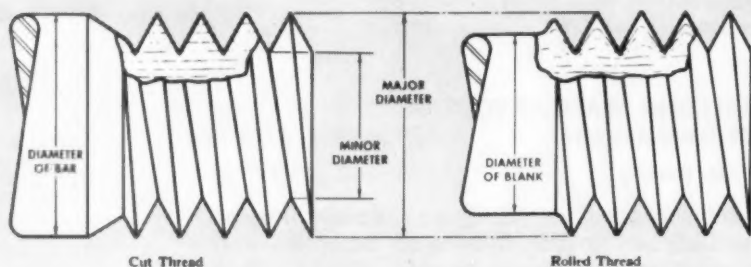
Drawing showing a comparison of a cut thread and a rolled thread.
